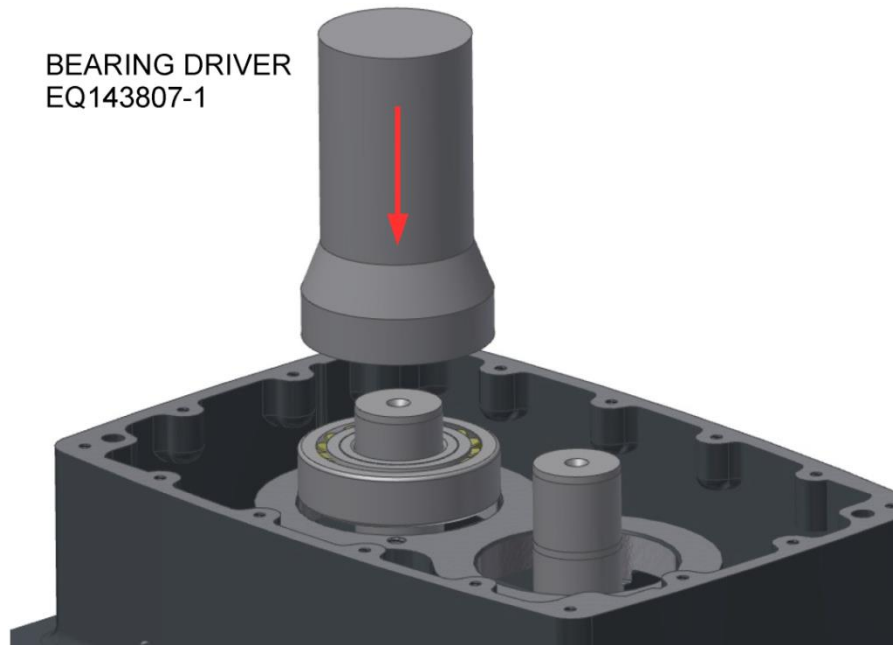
PRESS BEARING ONTO ROTOR SHAFT
